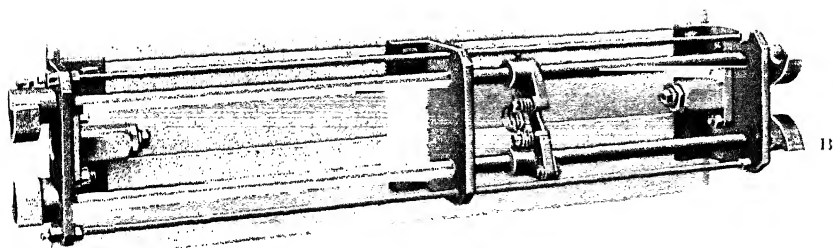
Instantaneous (serrated cam type) safety gear, fitted below car.
